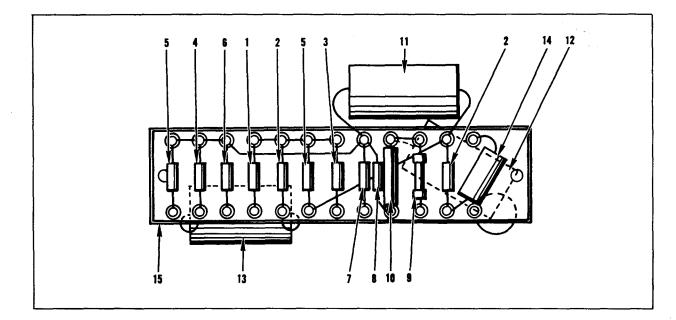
Terminal Board Assembly No. 1, Part No. 30977, Location of Parts
